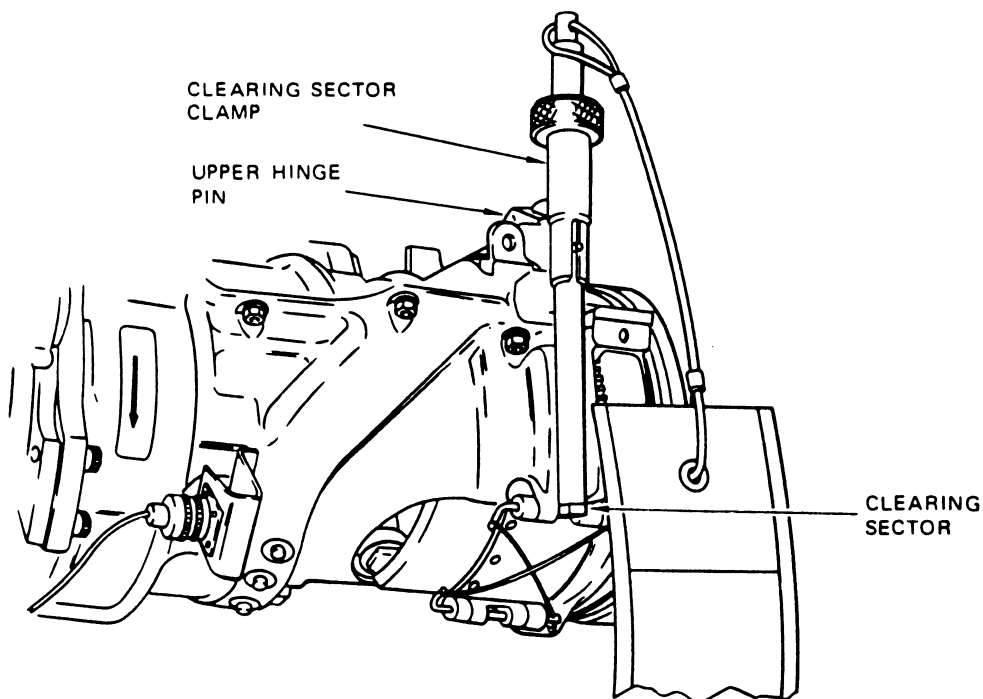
A-7E clearing sector clamp installed on gun.
